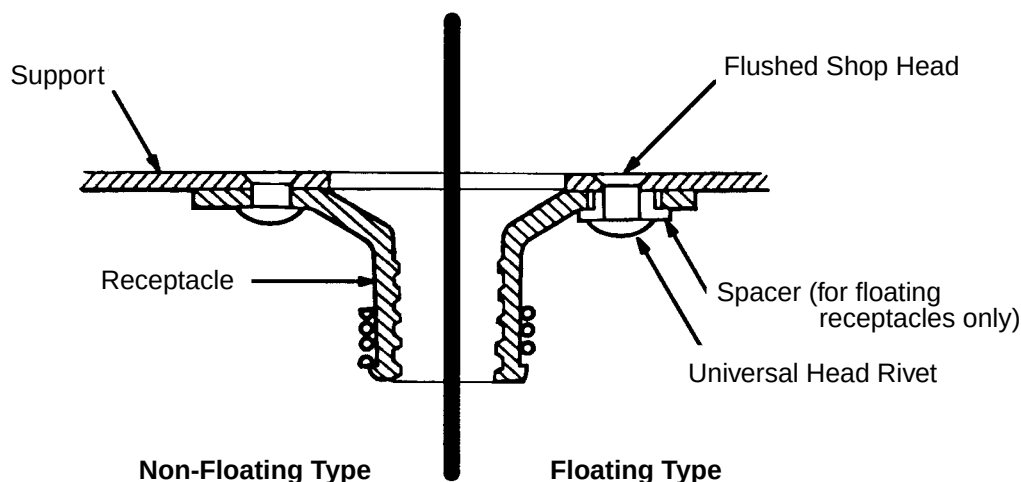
Receptacle Installation Using Protruding Head Rivets
